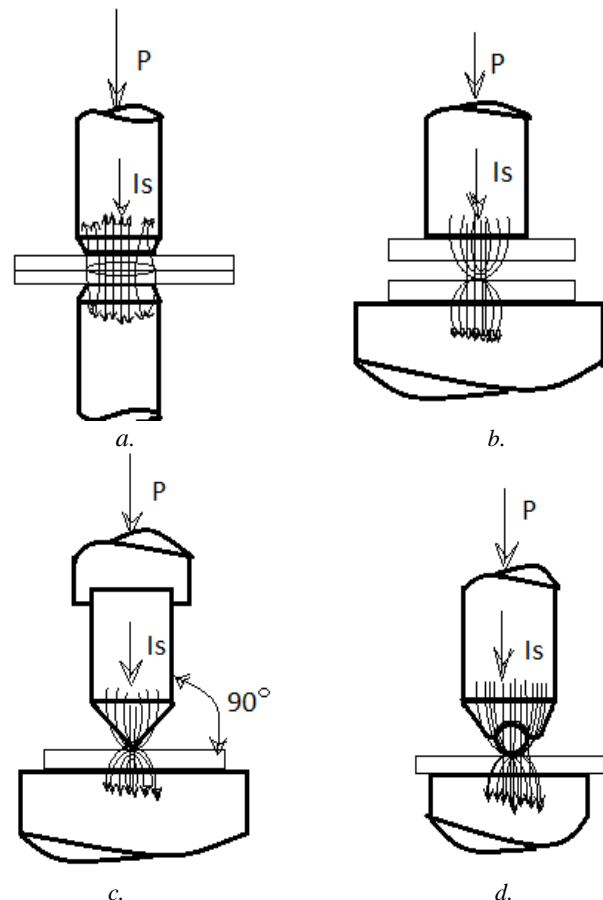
Focusing current at projection welding: a) Spot welding; b) Projection overlap welding; c) T Welding; d) Cross welding
